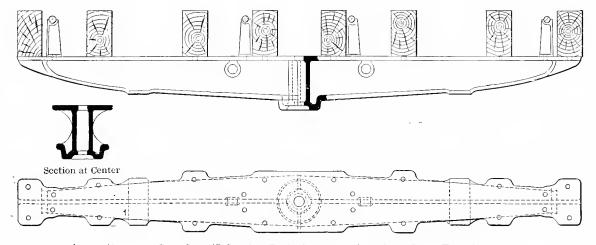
Cast Steel I-Section Body Bolster. American Steel Foundries.
